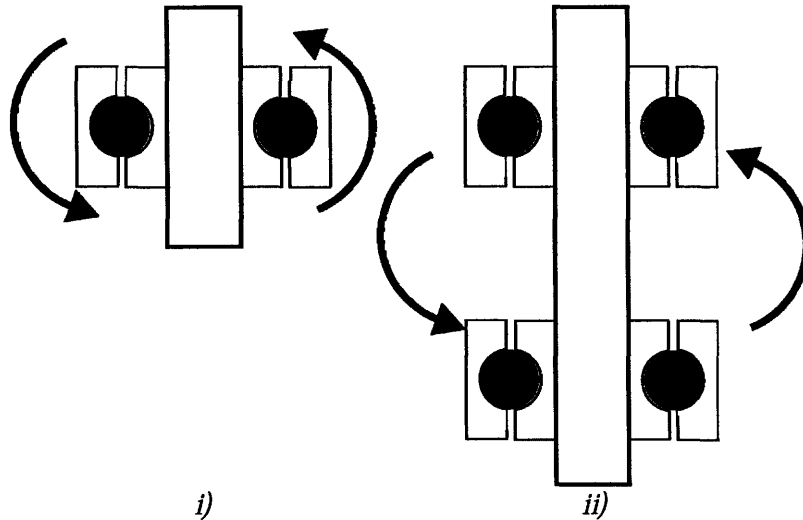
Cross section of the pin and bearings. In fig. i) in earlier designs, a single ball bearing does not properly constrain a moment. In fig. ii), the addition of a second bearing greatly increases moment stiffness.
